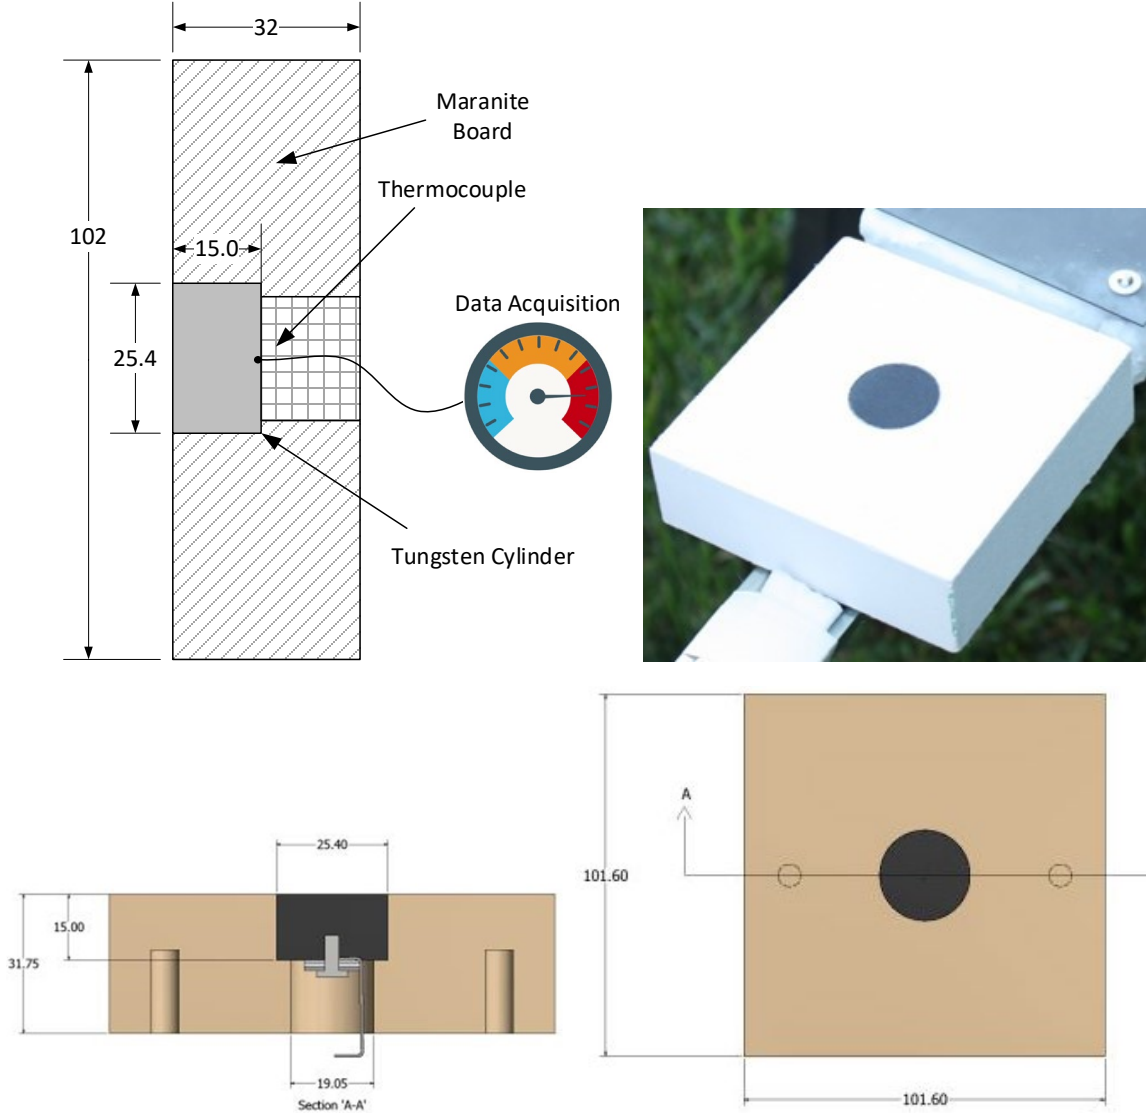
Thermal capacitance style slug, illustration (top left), photo of device being prepared in the field (top right), dimensional drawings showing internal construction (bottom left and right). All nominal dimensions in mm.
